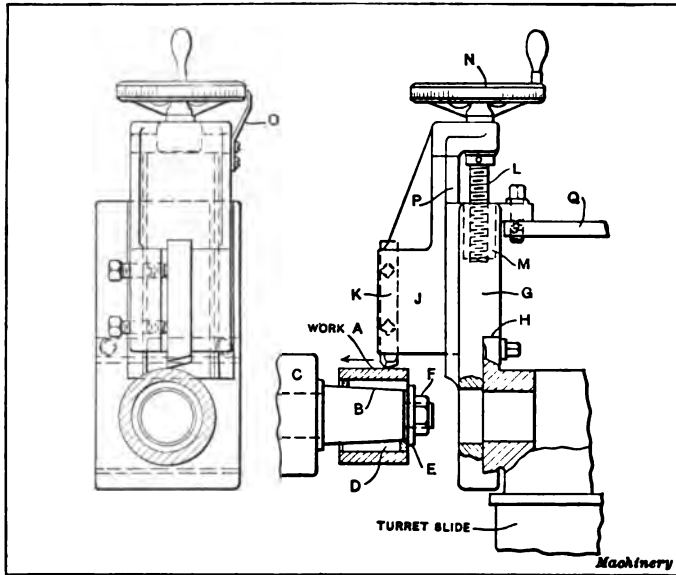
Adjustable Turning Tool for finishing the Outside of Short Bushings
